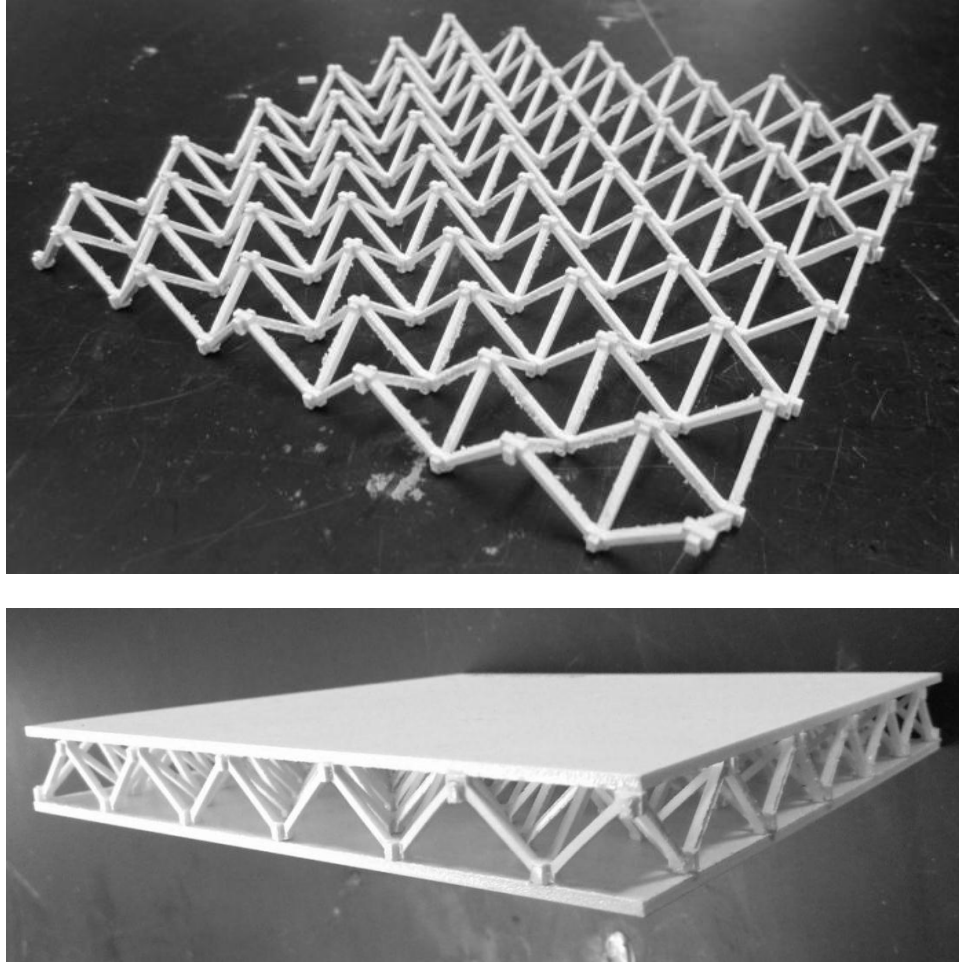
Truss system design by Thomas Goutierre, made by Kevin Chen. A constructed truss (top) and a truss installed between two panel faces (bottom).[17][18]
